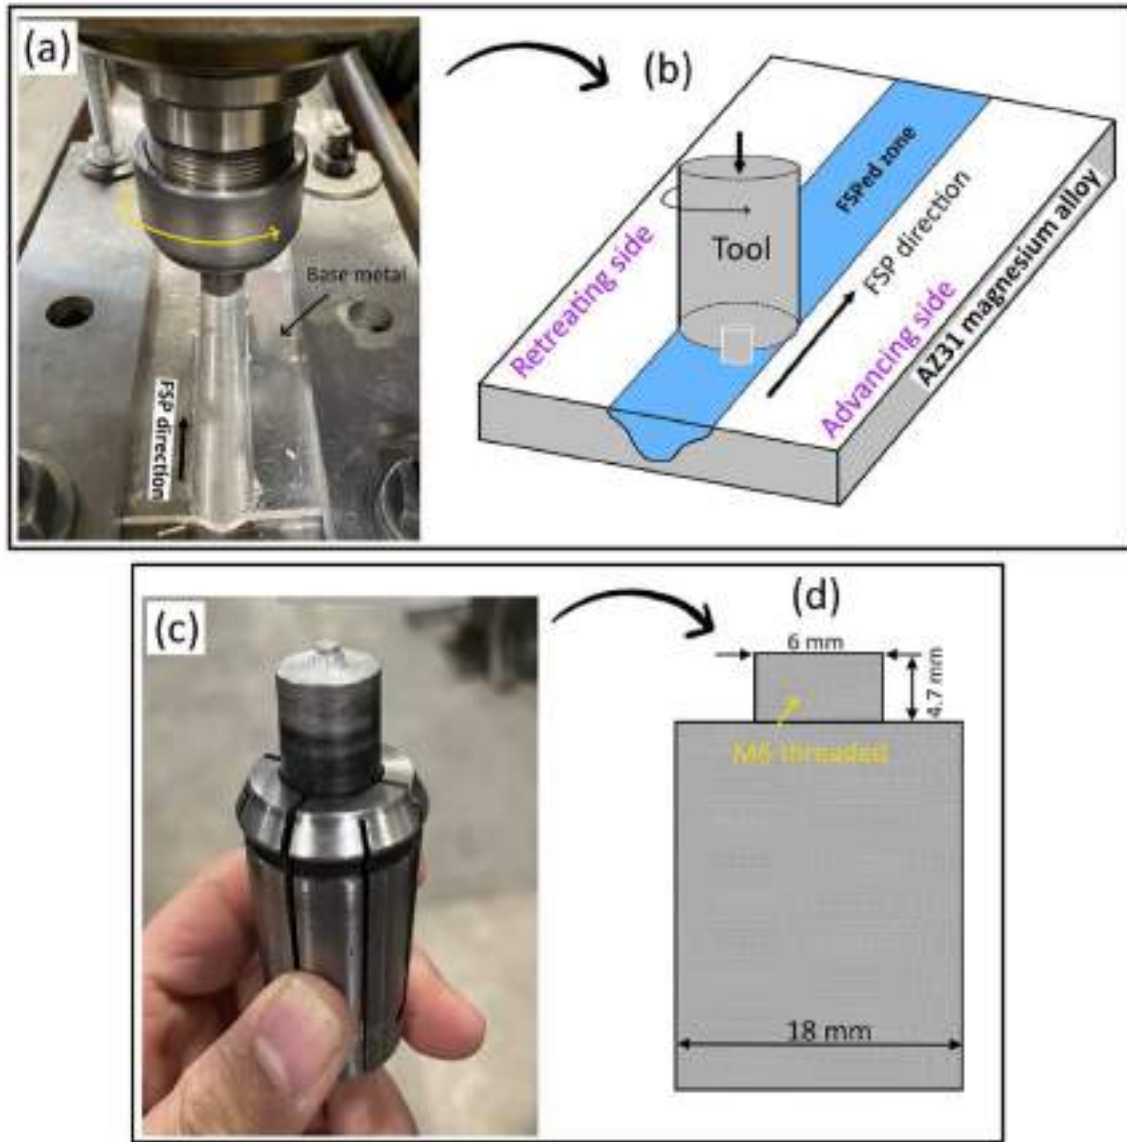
FSP processing of AZ31B Mg/ZrO₂+CeO₂ hybrid composite with FSP tool (a), (b) actual and schematic FSP process, and (c) welding tool, (d) dimensions of the welding tool.
